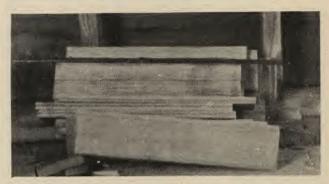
Short Lengths Could Have as Well Been Used to Cut 400 of These Pieces of 1 by 4 by 15-Inch Ceiling Which Were Cut from 18-Foot Lengths.
